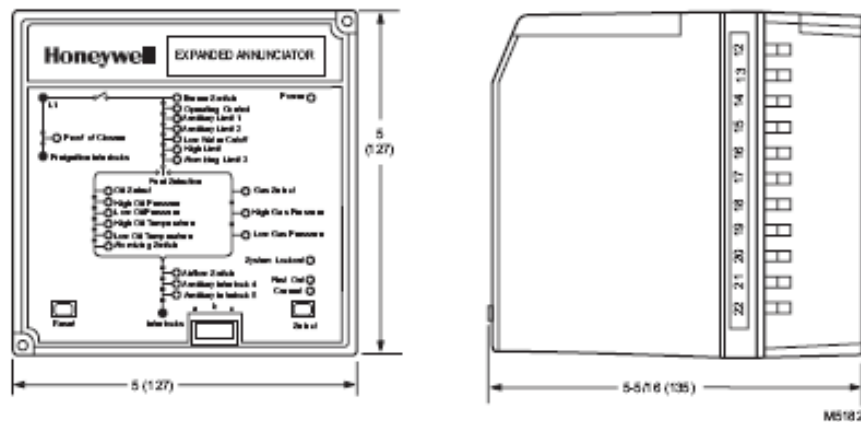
Mounting dimensions of S7830 Expanded Annunciator and Q7800A Wiring Subbase in. (mm).
